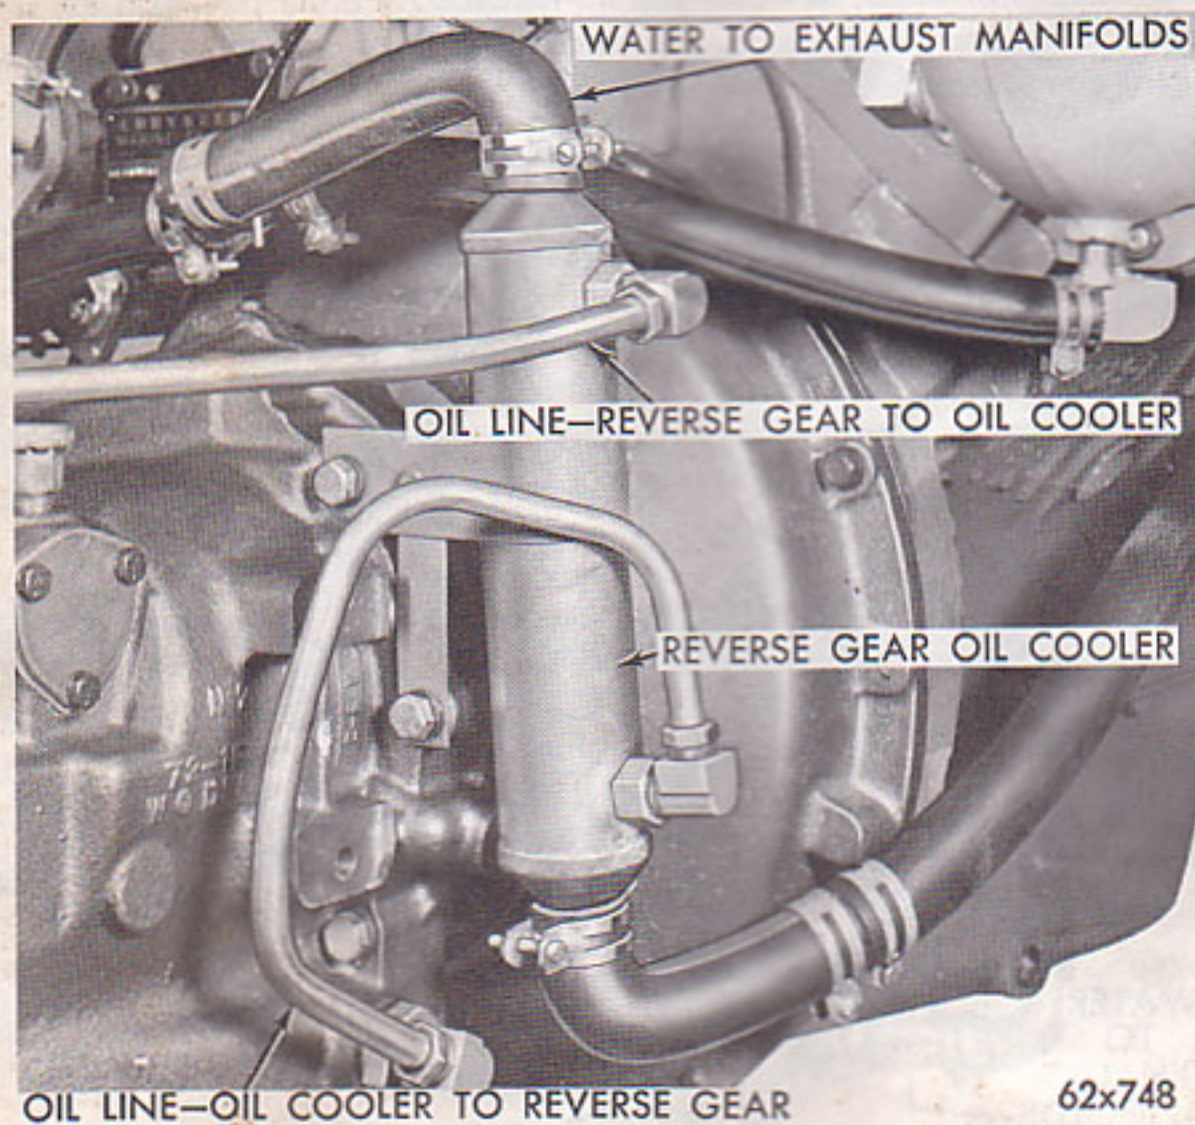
Reverse Gear Oil Cooler Connections Models M-383, M-413, M-426
